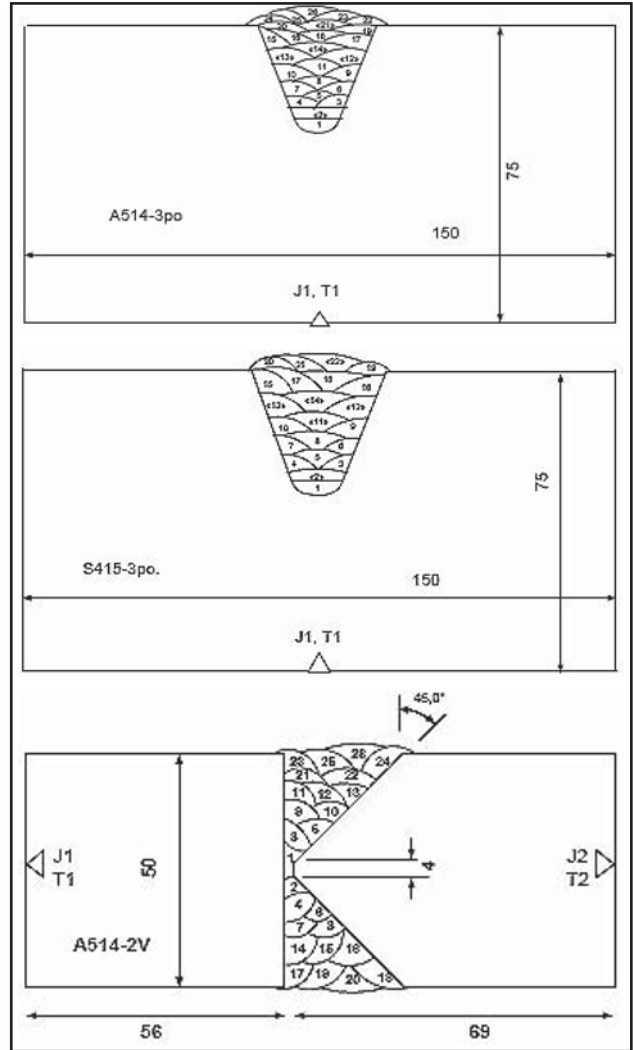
Dimensions of the 3 weld test blocks with the location of the weld beads and of the strain gauges J1 and thermocouples T1
